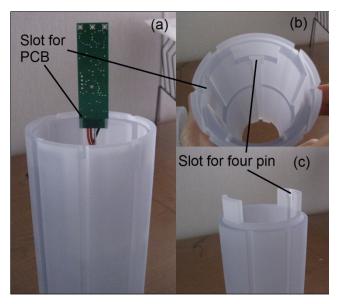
Stereolithography (SLA) prototype showing slots for time domain reflectometry printed circuit board (PCB) and for buss and four-pin connectors: (a) side view; (b) bottom view; (c) top view.
